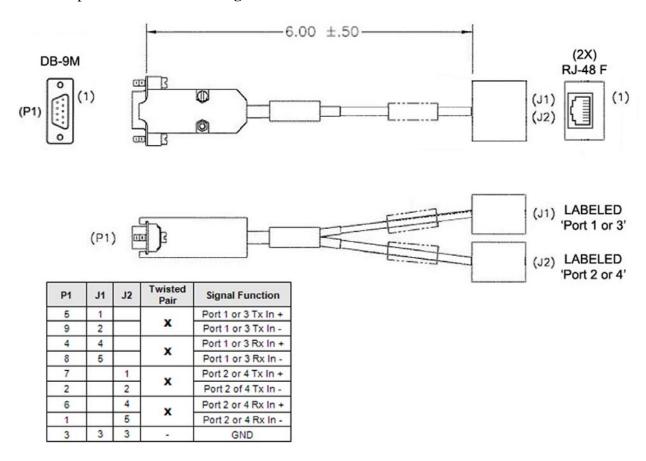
Quad E1 'Y' Splitter Adapter Cable (CEFD P/N CA-0000164)
